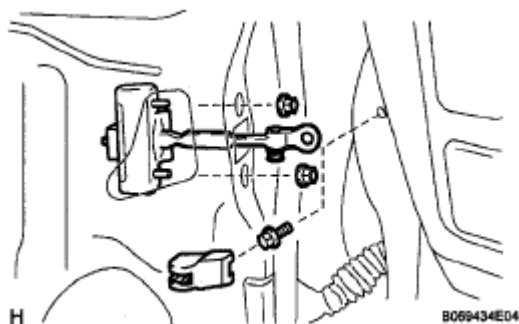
Identifying Rear Door Check Assembly Bolt And Nuts
